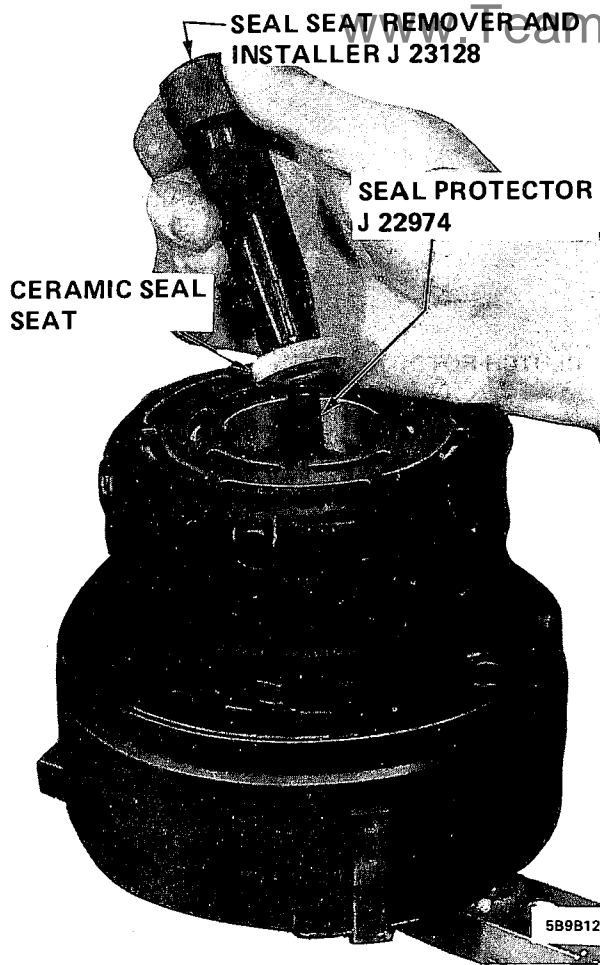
B-35 - Using Tool J23128 - 4 Cylinder Compressor
